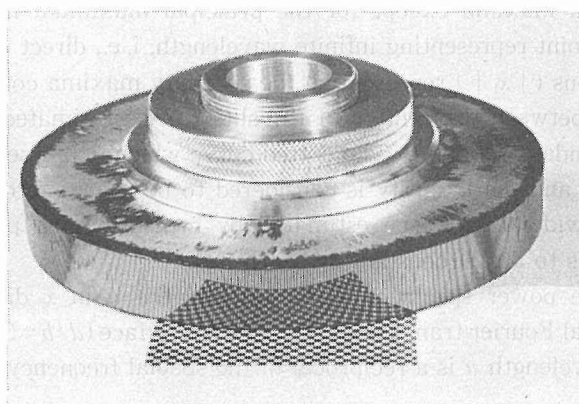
Photograph of the grating surface of aluminum disk wheel
